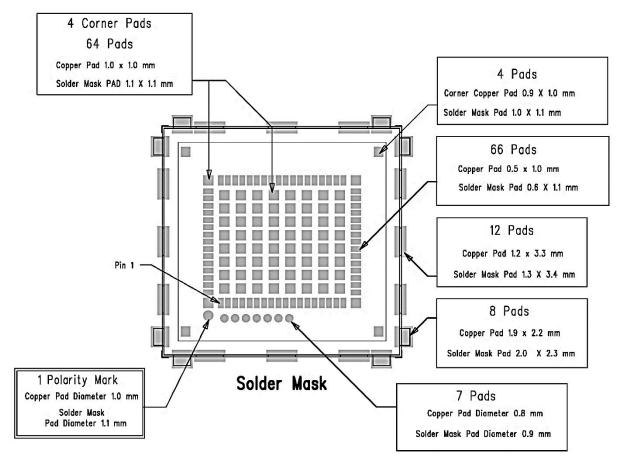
Recommended HL Series Snap-in Socket Footprint – Solder Mask Layout
